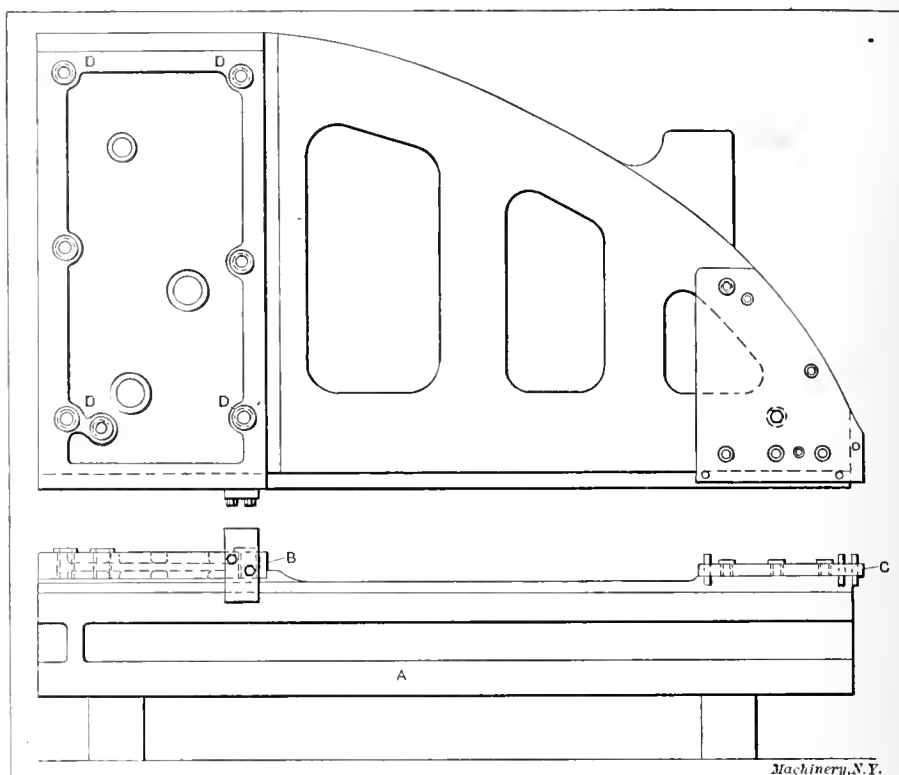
Front Housing with Jigs in Position for Drilling Clamping Bolt Holes. Same Jigs are used for Similar Operations on the Back Housing
